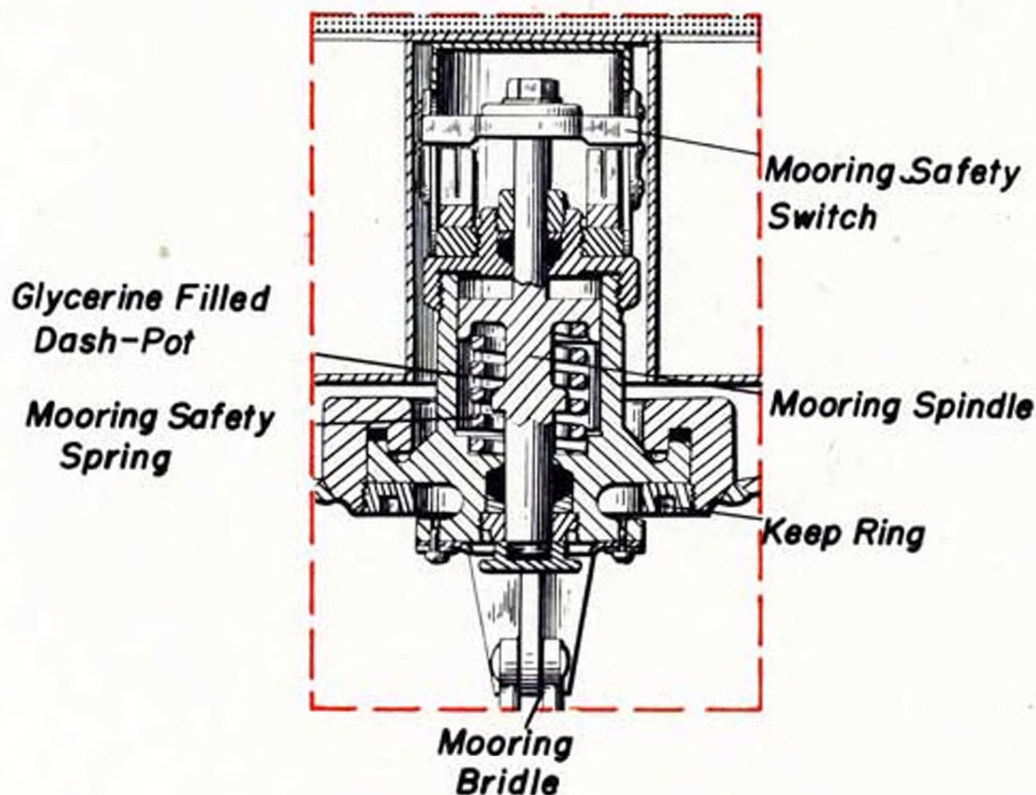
Mooring Safety Switch Detail, Mine Type JH
